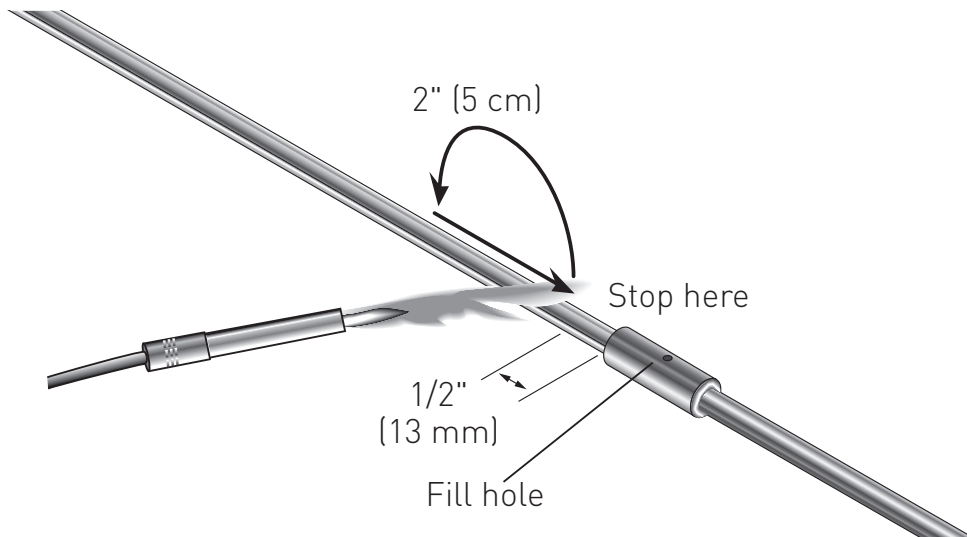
Sweep flame to end stopping 13mm (1/2") from end of joint/end cap
